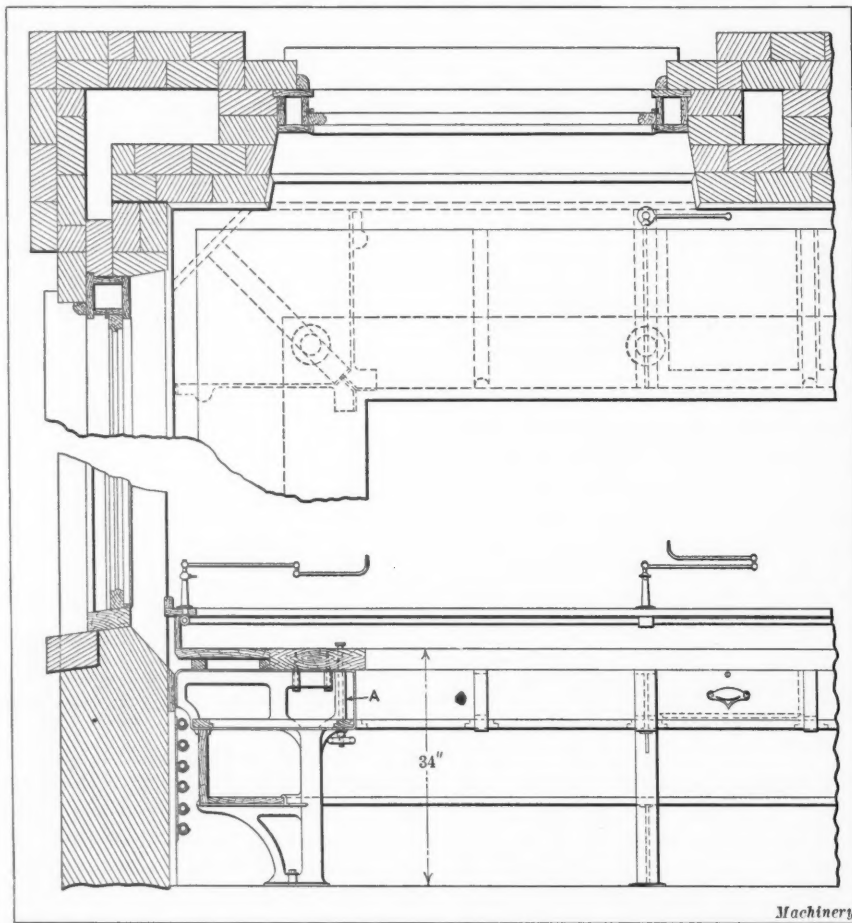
Elevation and Plan illustrating Corner Construction of Work-bench
